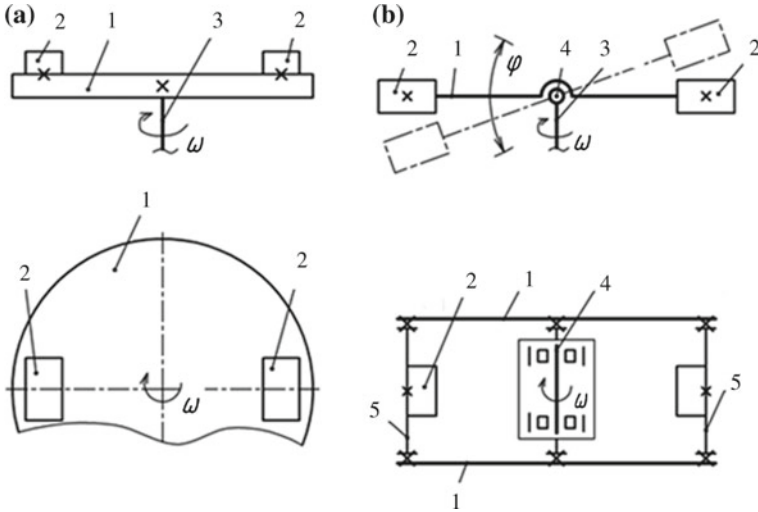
Typical scheme of centrifuge rotors: a scheme with a disk “rigid” rotor; b scheme with a swinging rotor; 1 rotor, 2 product, 3 drive shaft, 4 hinge, 5 traverse
